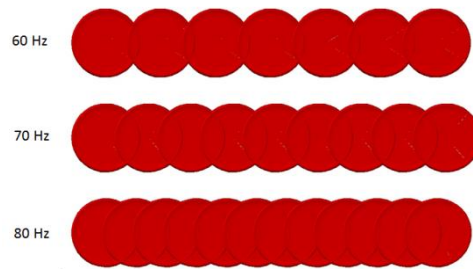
Schematic of welding seam generated in laser welding with different pulse frequency
